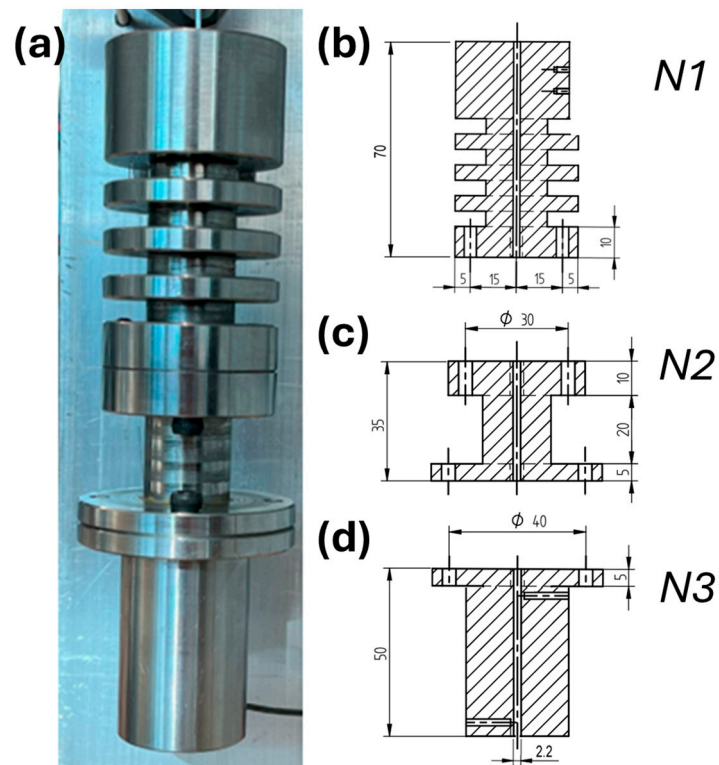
Custom-made printing head for the laboratory-scale thixo-printing system realized in 304 stainless steel (a) and technical drawings of the different parts (b–d).
